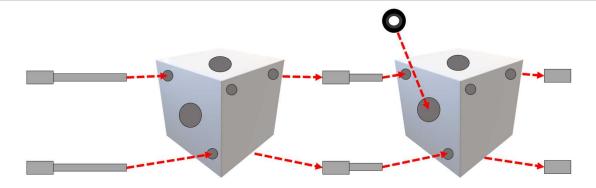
Connection of purge solenoid valve to the first solenoid valve
